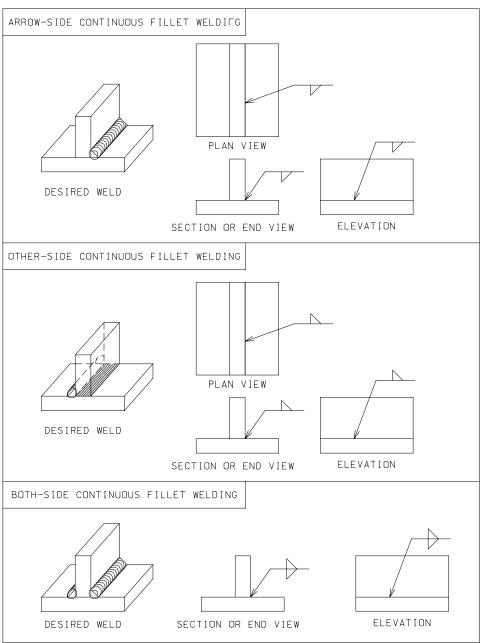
Application of Symbols - Fillet Welds - General
